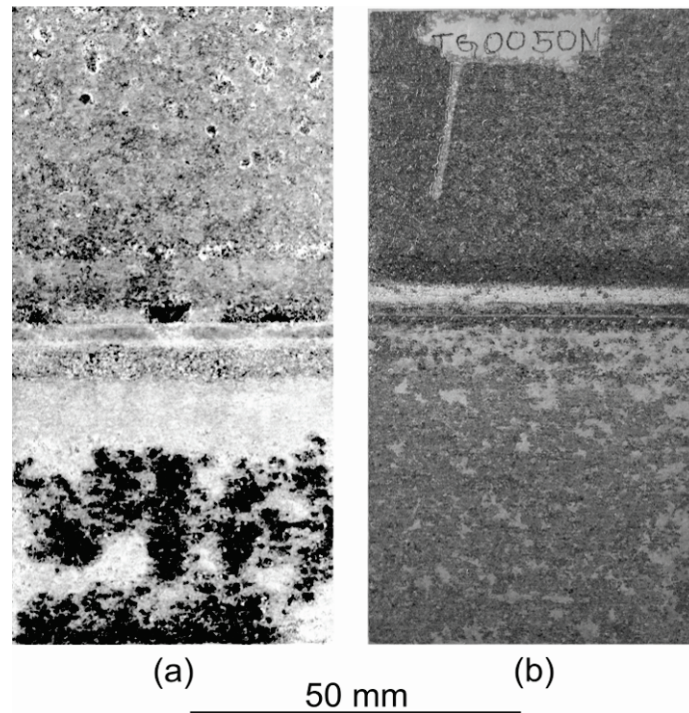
Surface appearance of dissimilar FSW 2024A/6056 panels in (a) as welded and (b) PWHT conditions after 335 hours of intermittent salt spray testing. The 2024A parent material is at the lower side of the panels.
